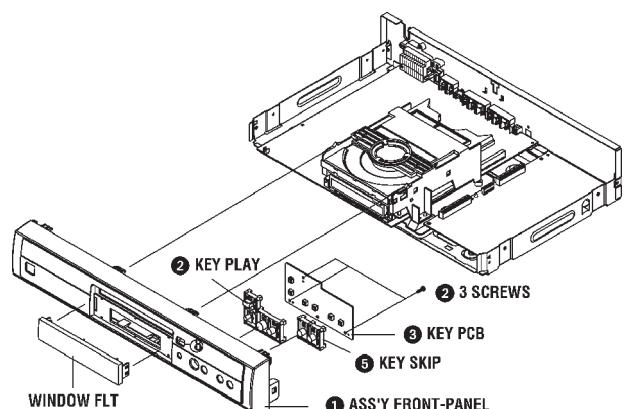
Removing Assembly Front-Panel and Key PCB
